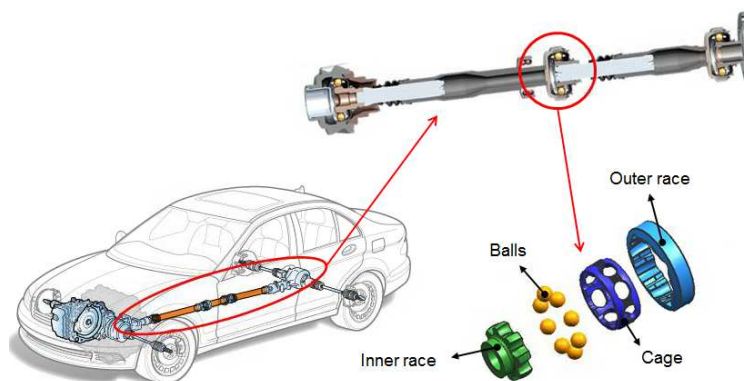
Propeller shaft joint: According to the excitation force parts can get or lose contact
